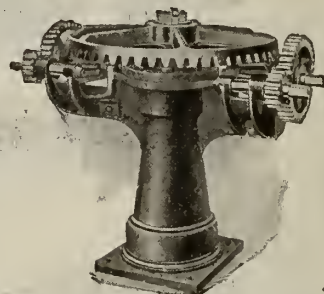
TWO-SPEED ROLLER BEARING PEDESTAL
